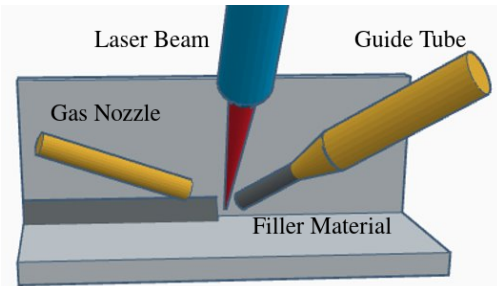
High-level mechanics of *Laser Beam Welding*.
